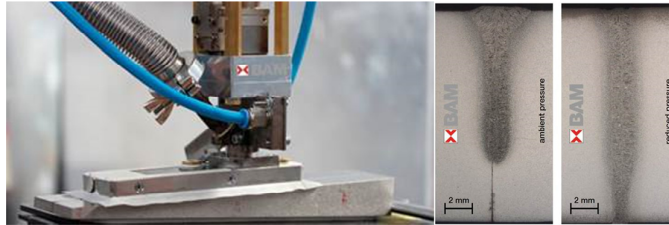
(a) Mobile vacuum device and for laser beam welding under reduced pressure; (b) Macrosection of 15 mm steel, laser beam power 7 kW, welding speed 0.75 m/min.
